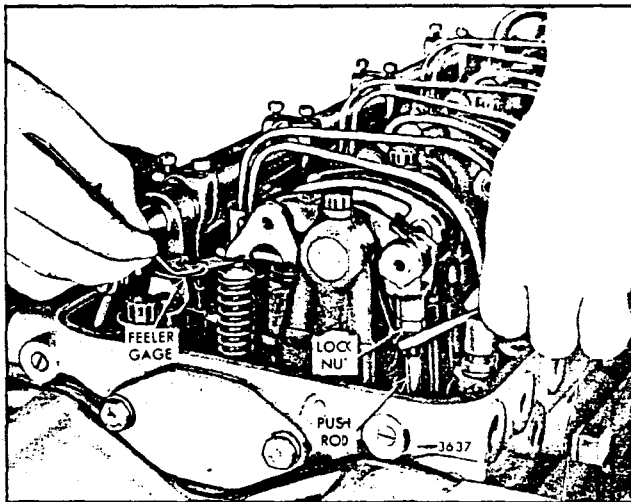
Adjusting Valve Clearance (Four-Valve Cylinder Head)
